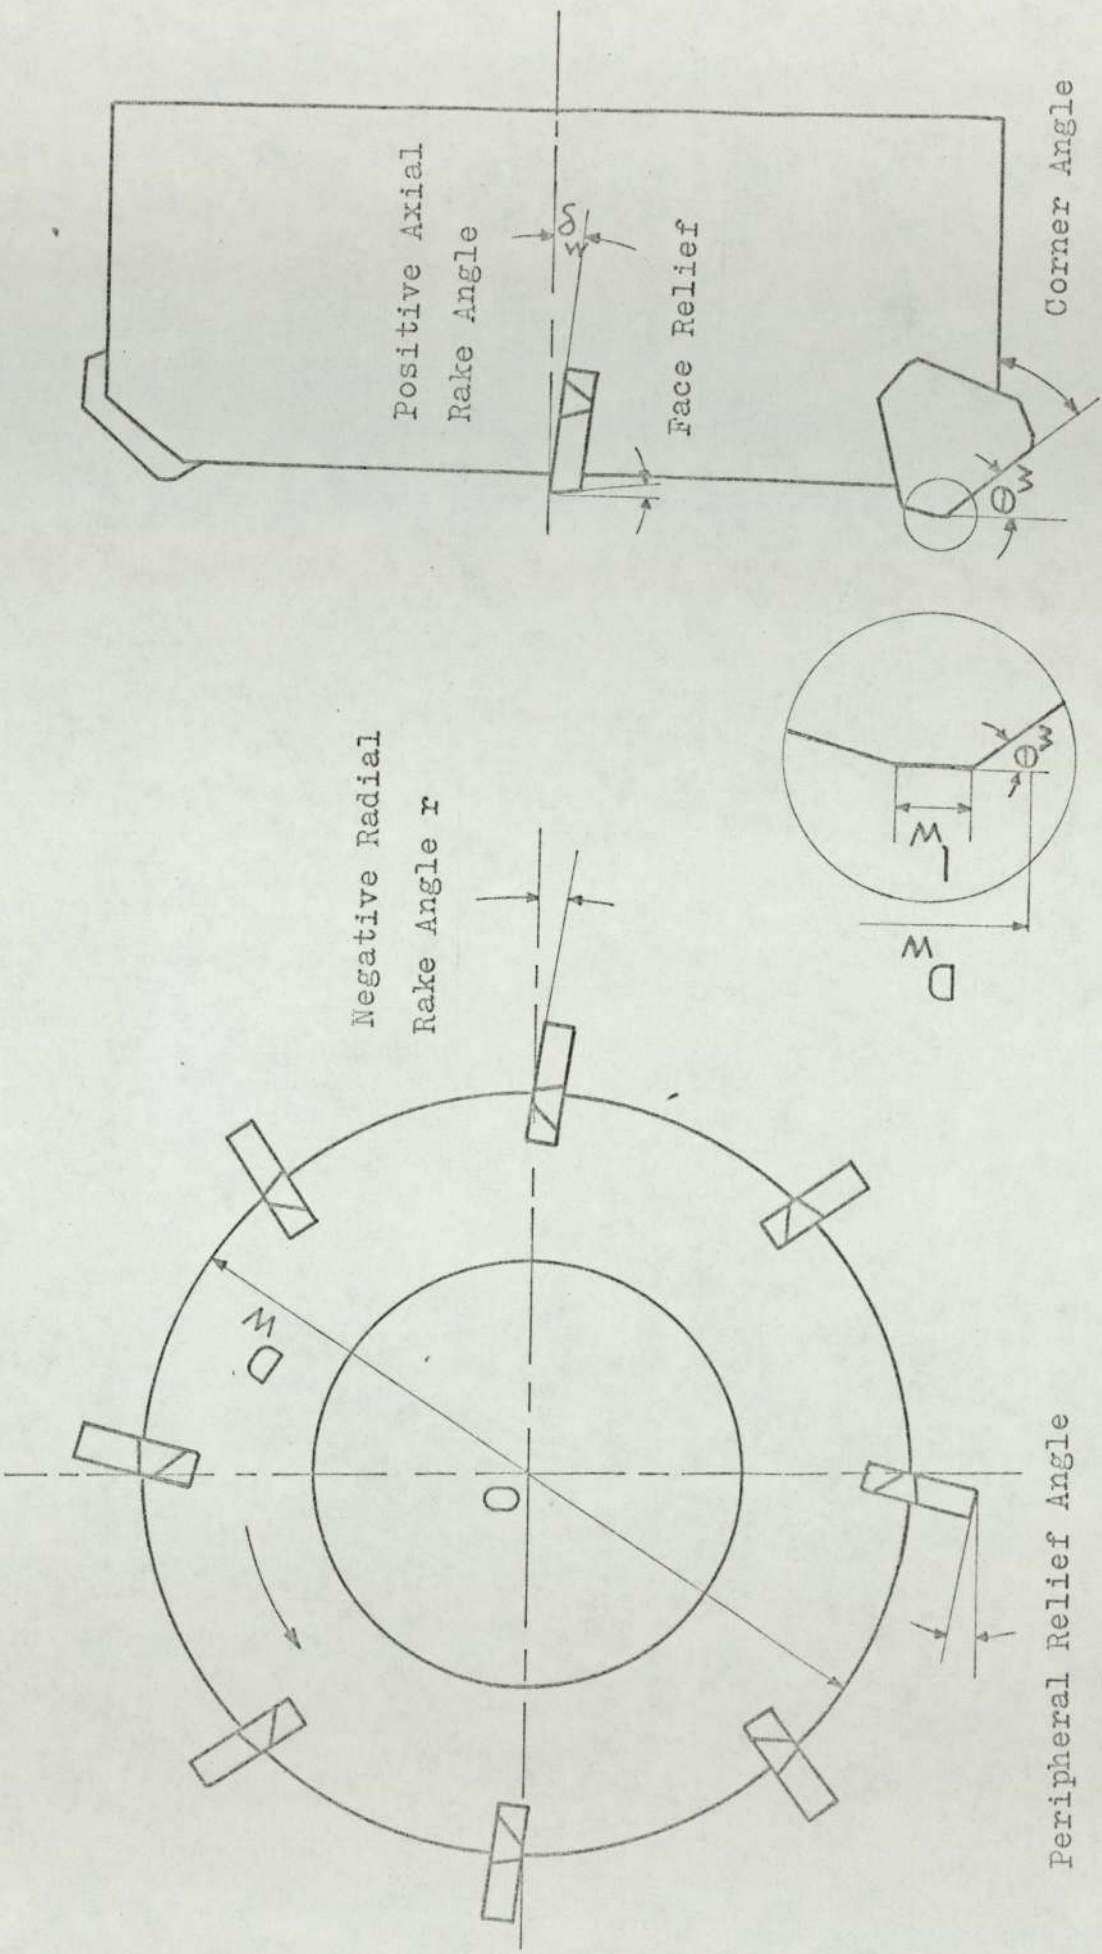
Wendelnovex F244 Walter Milling Cutter with indexable Right Hand P25 inserts
